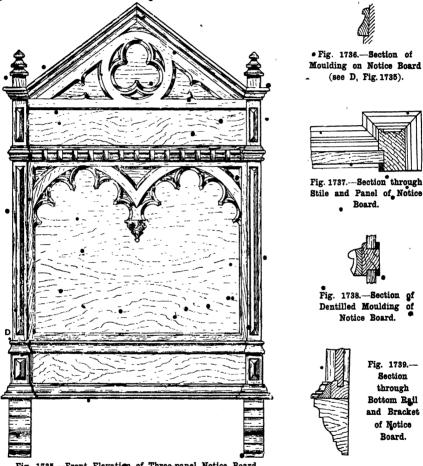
Front Elevation of Three-panel Notice Board.
